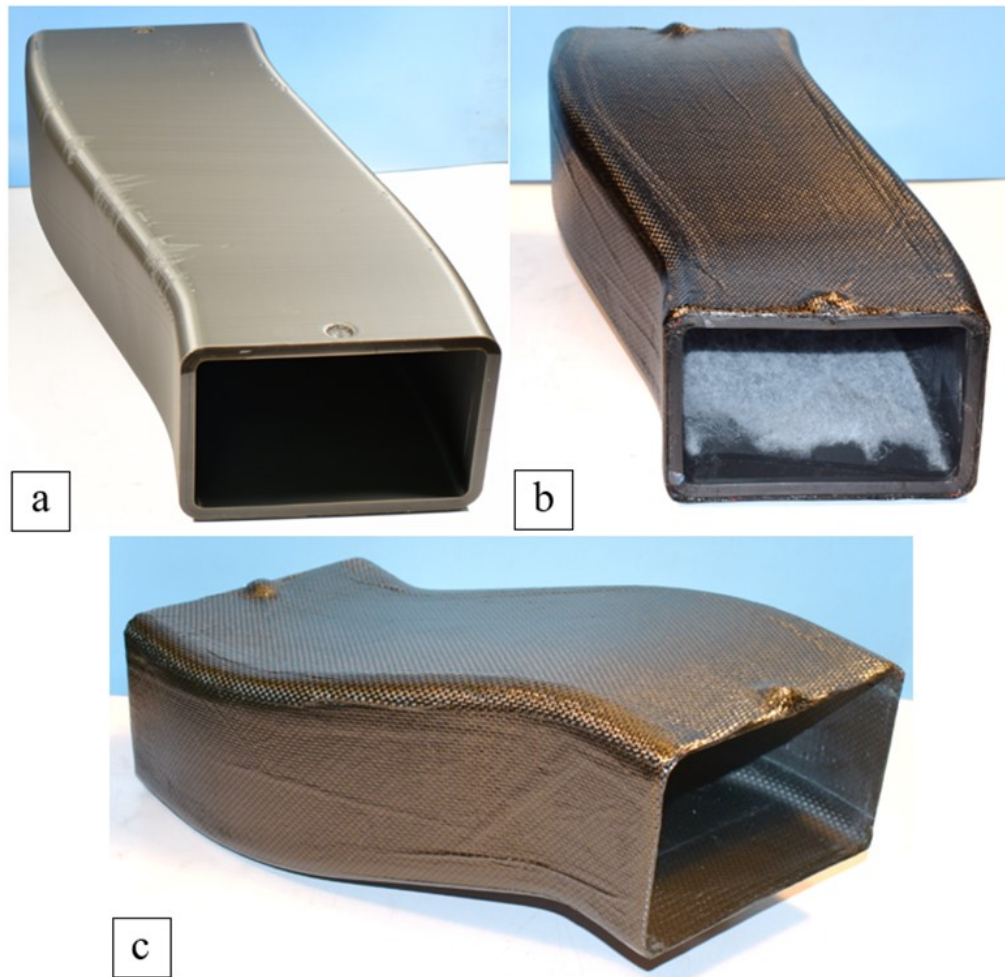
The printed tool (a), the composite manufactured on the tool (b), and the composite part after the tooling was removed (c).
